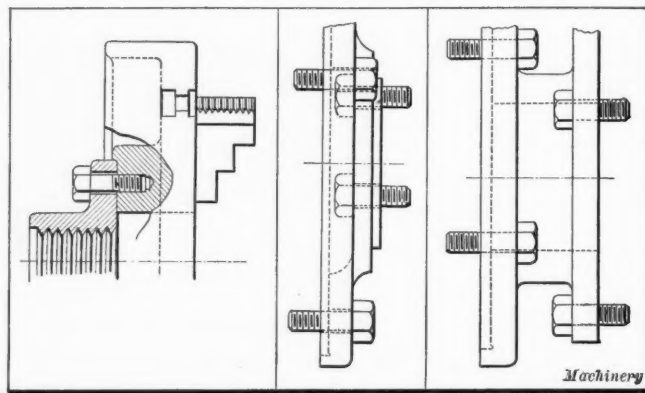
Ordinary Way of fitting Chuck to Lathe Spindle with Adapter
